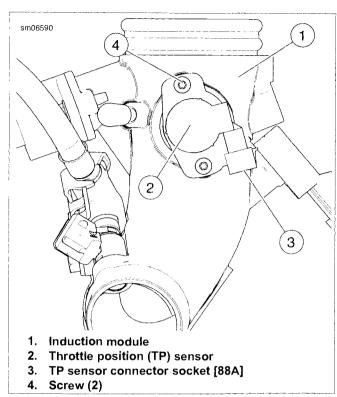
Throttle Position (TP) Sensor Removal (XR Models)
